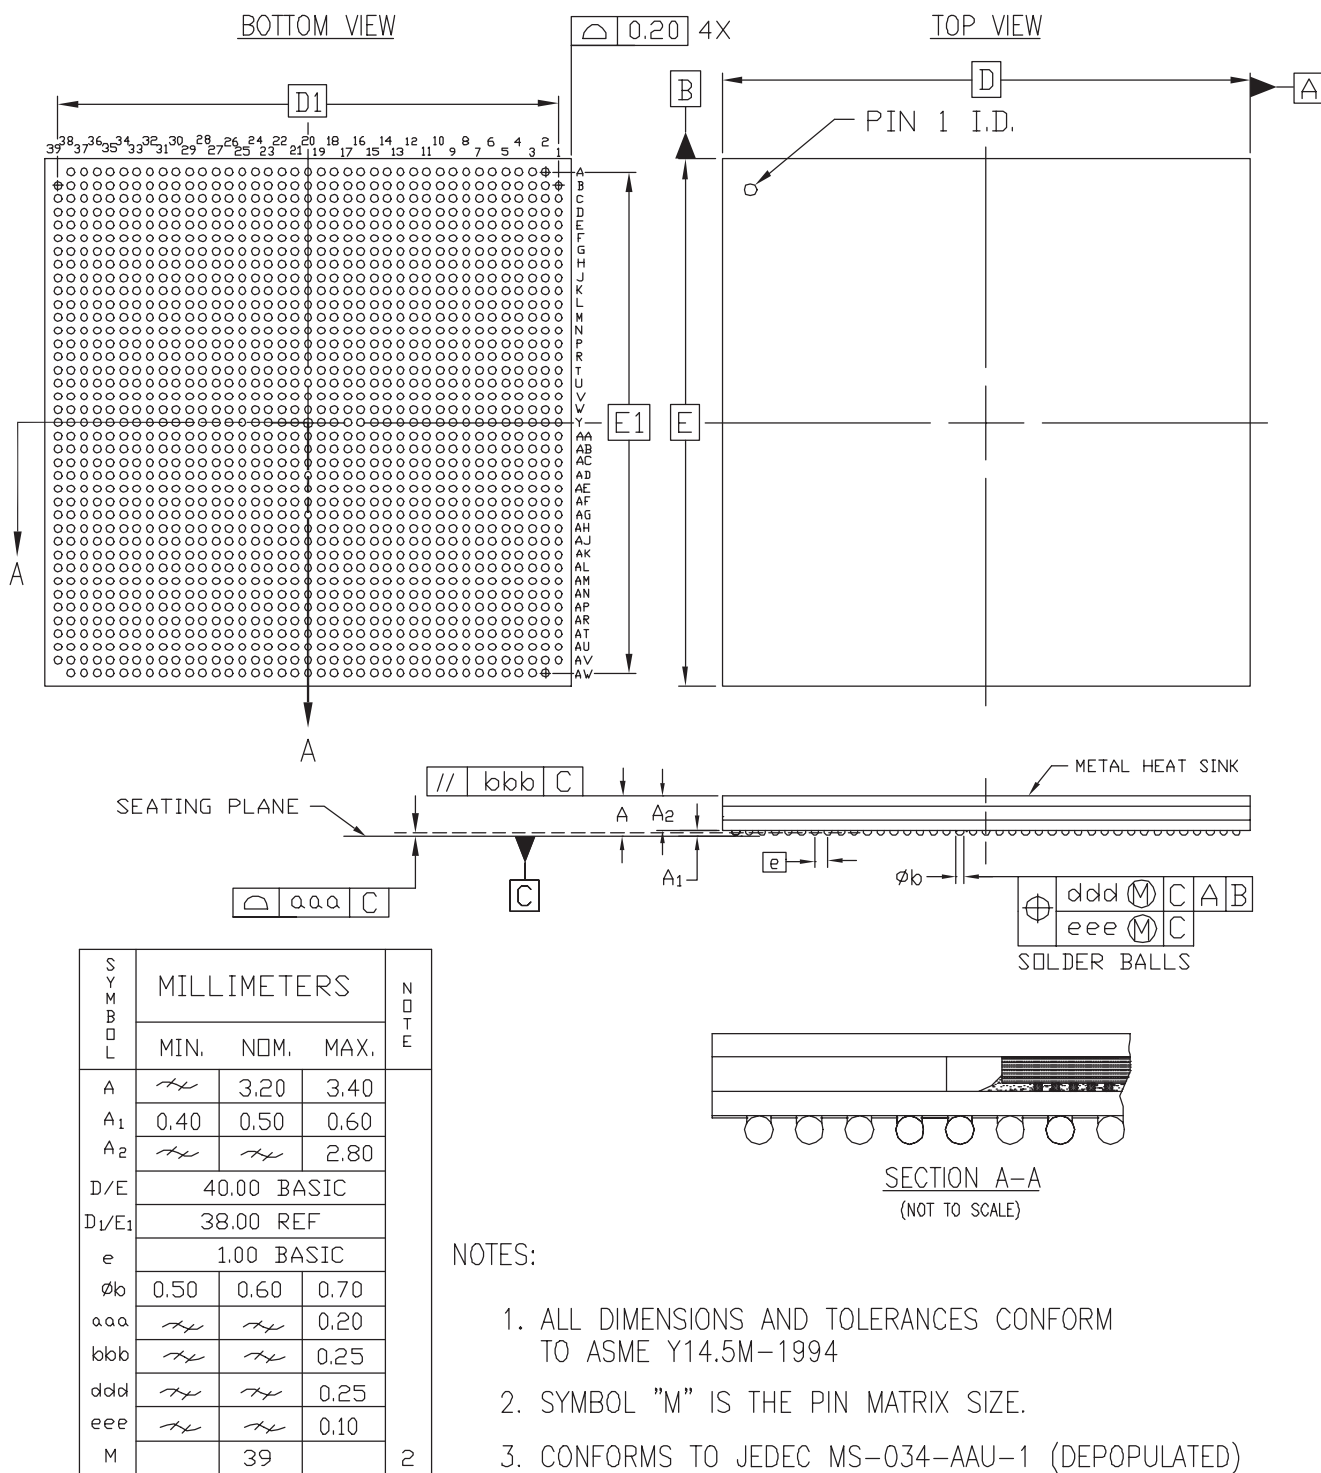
FF1517 Flip-Chip Fine-Pitch BGA Package
